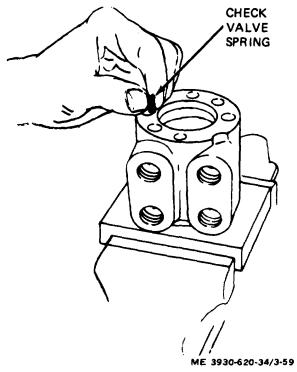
Check valve spring being installed. CHECK VALVE SEAT
